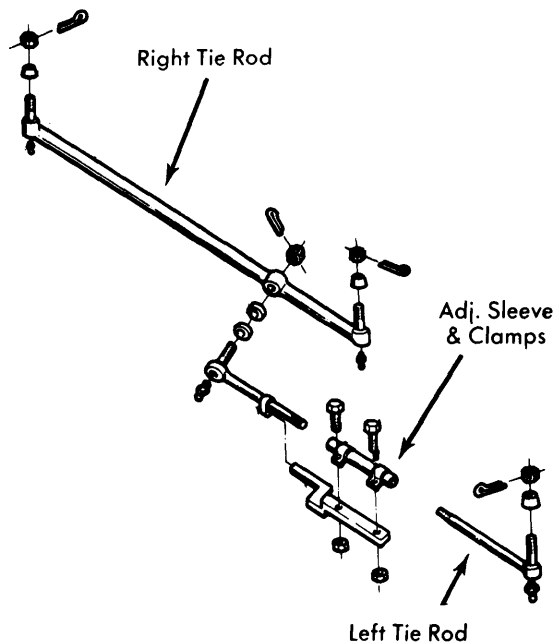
Disassembled View of Steering Linkage for "E", "F" and Bronco Models
